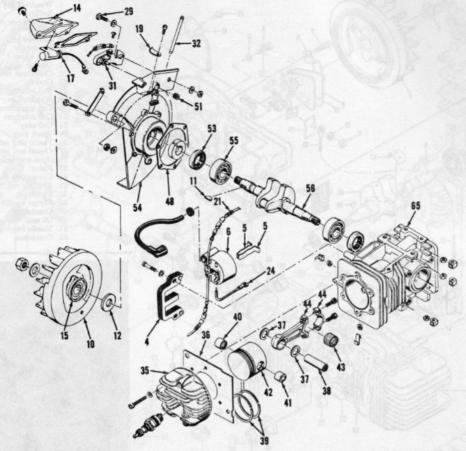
Exploded view of MC-10 engine. Note external breaker box on crankcase cover (54) and push rod (32) that actuates breaker points.
